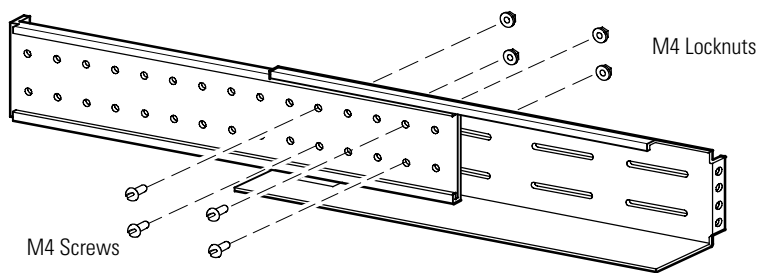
Tightening the Rail Adjustment (Right Rail Assembly Shown)
